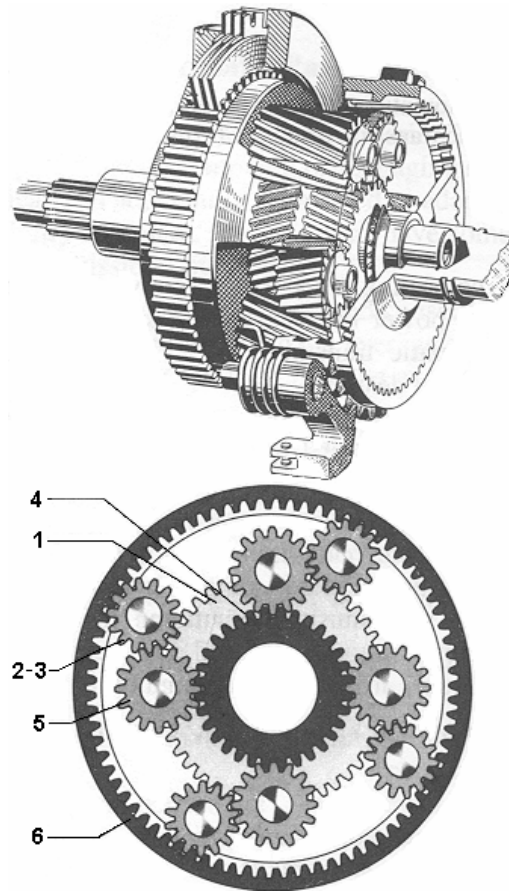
Ravigneaux planetary gear [17]: 1 small sun gear; 2-3 broad planet gear; 4 large sun gear; 5 narrow planet gear; 6 ring gear.
